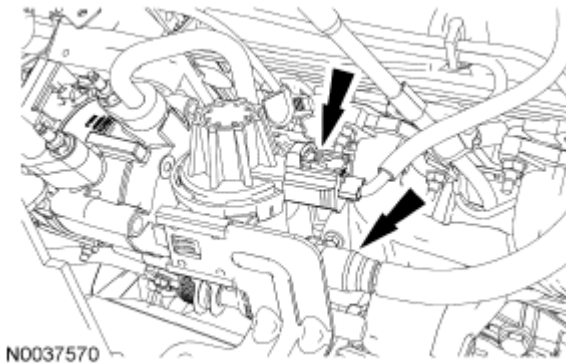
Locating EVAP Canister Purge Valve Electrical Connector And EVAP Hose
